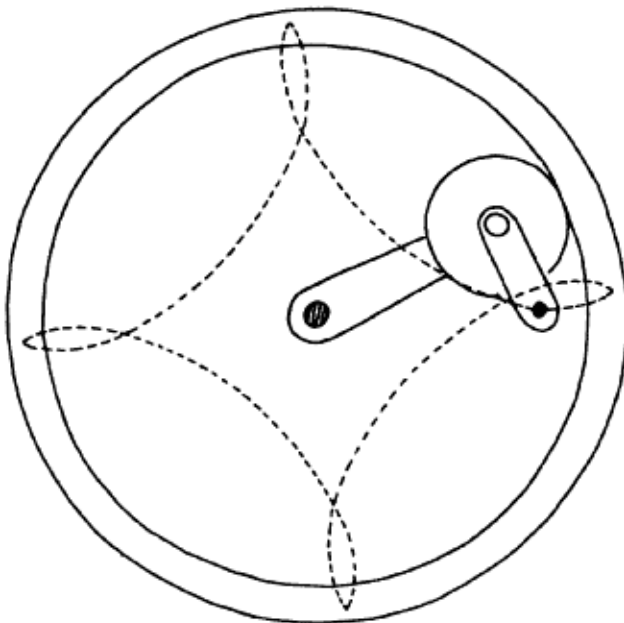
Schematic representation of a four-to-one hypocycloidal gear train with the drive pin mounted beyond the pitch line of the planet gear.
